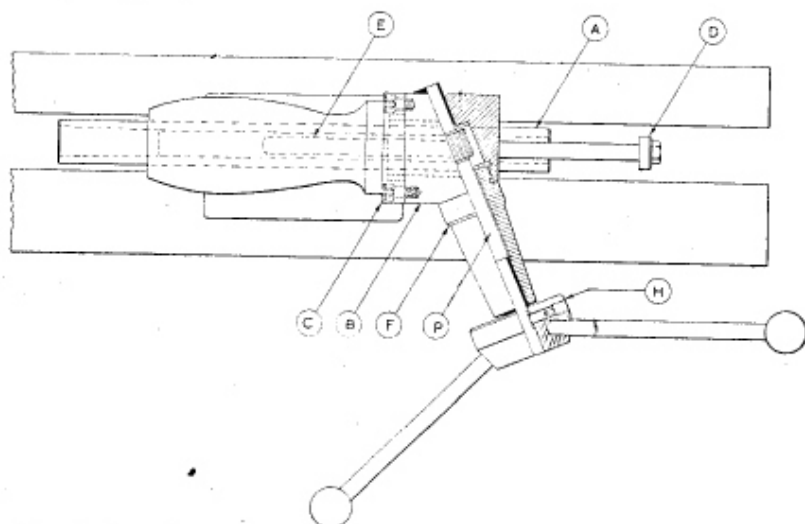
General arrangement of the skew-rack feed tailstock mechanism
